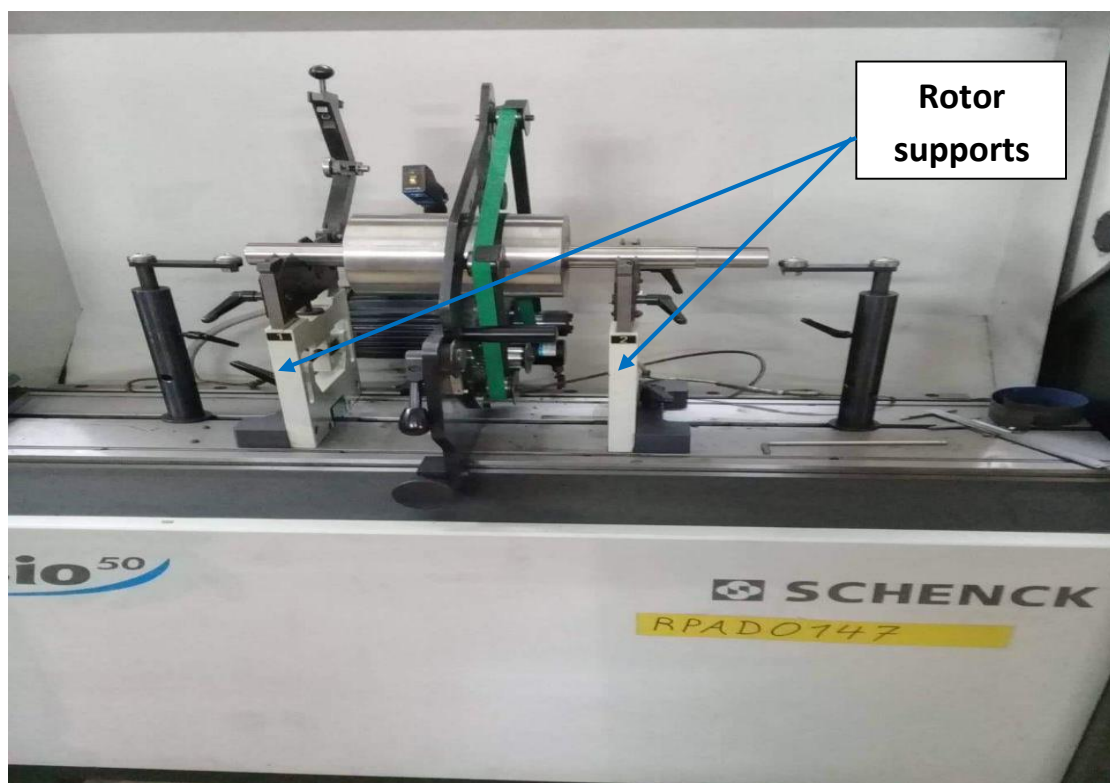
The rotor of the current work installed on the Schenck balancing machine.
